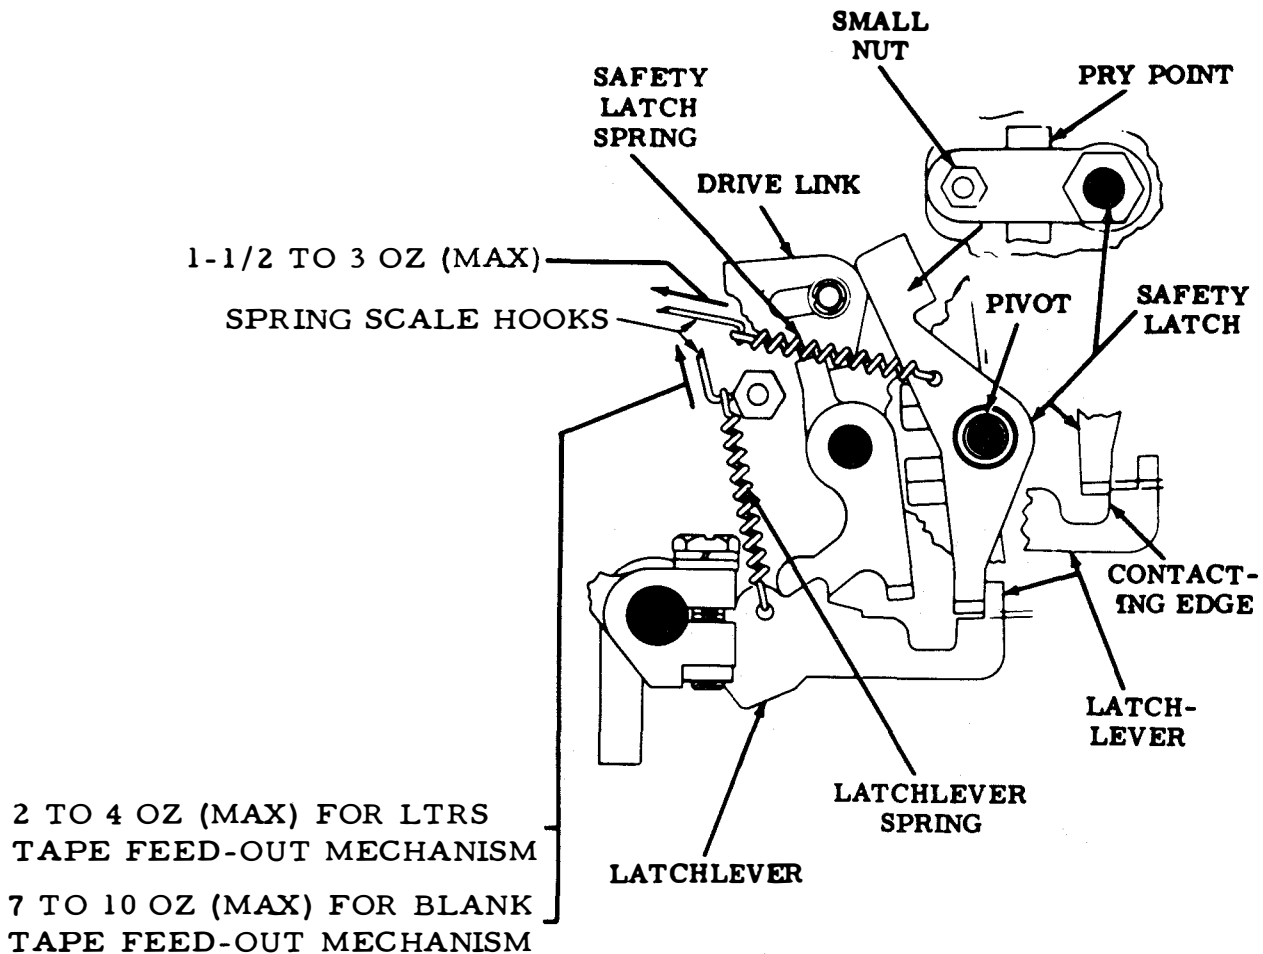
Safety Latch Spring and Latchlever Spring - Rear View
